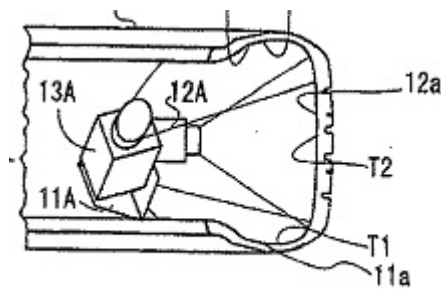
Tire appearance inspection apparatus (source: [17])
